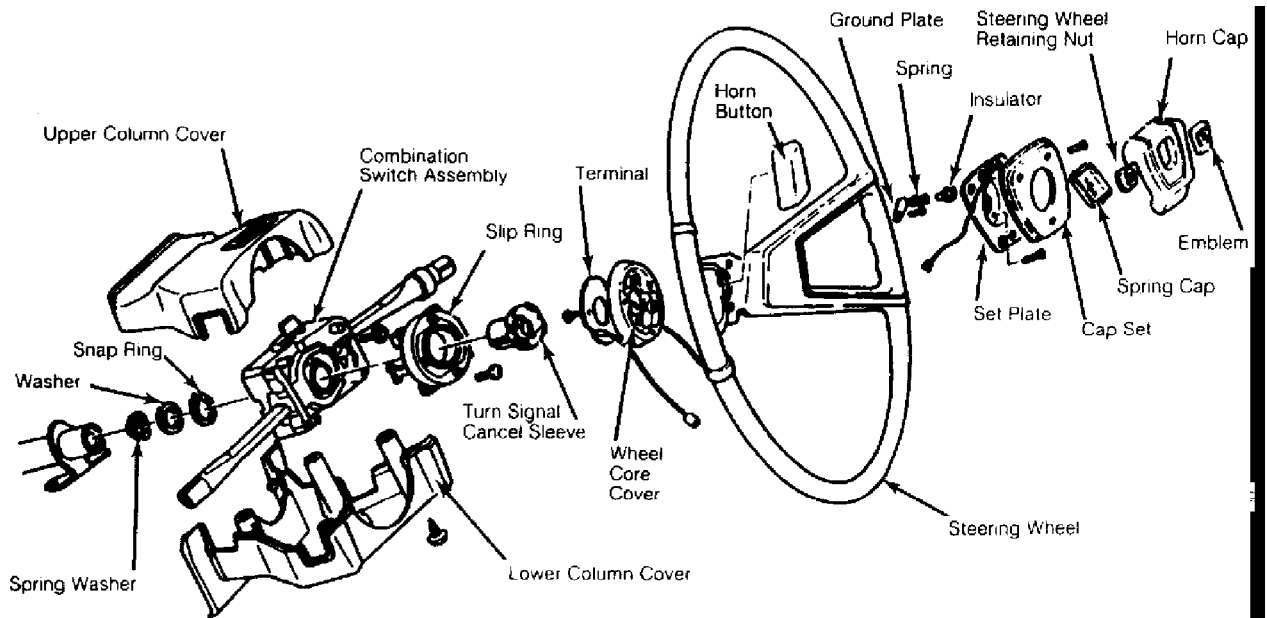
Exploded View of Typical Steering Wheel Assembly
